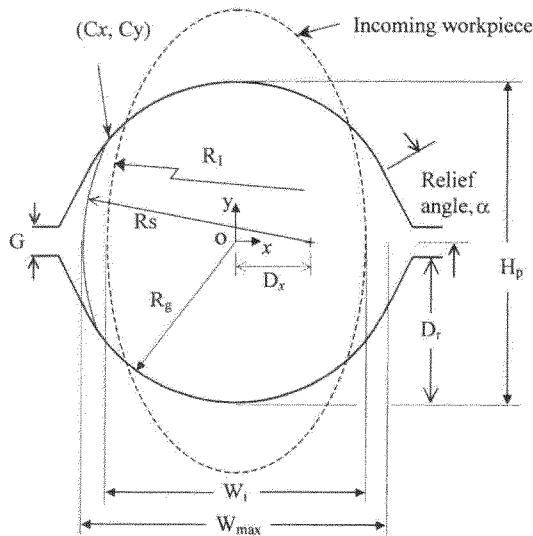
Geometrical designation of roll groove, the incoming workpiece and the radius of surface profile,  $R_s$ , of the outgoing workpiece in oval-round pass rolling. The  $R_s$  on the right hand side is omitted for clarity
